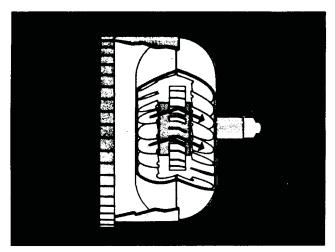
In a torque converter, the stator re-directs the driving oil in a helping direction back into the impeller.
